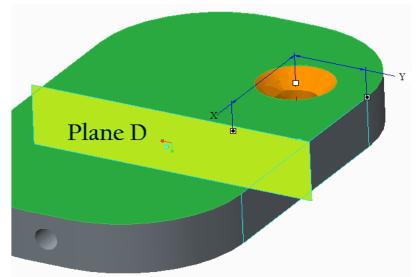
Hole placement on the upper part of the housing unit to accommodate the screws
